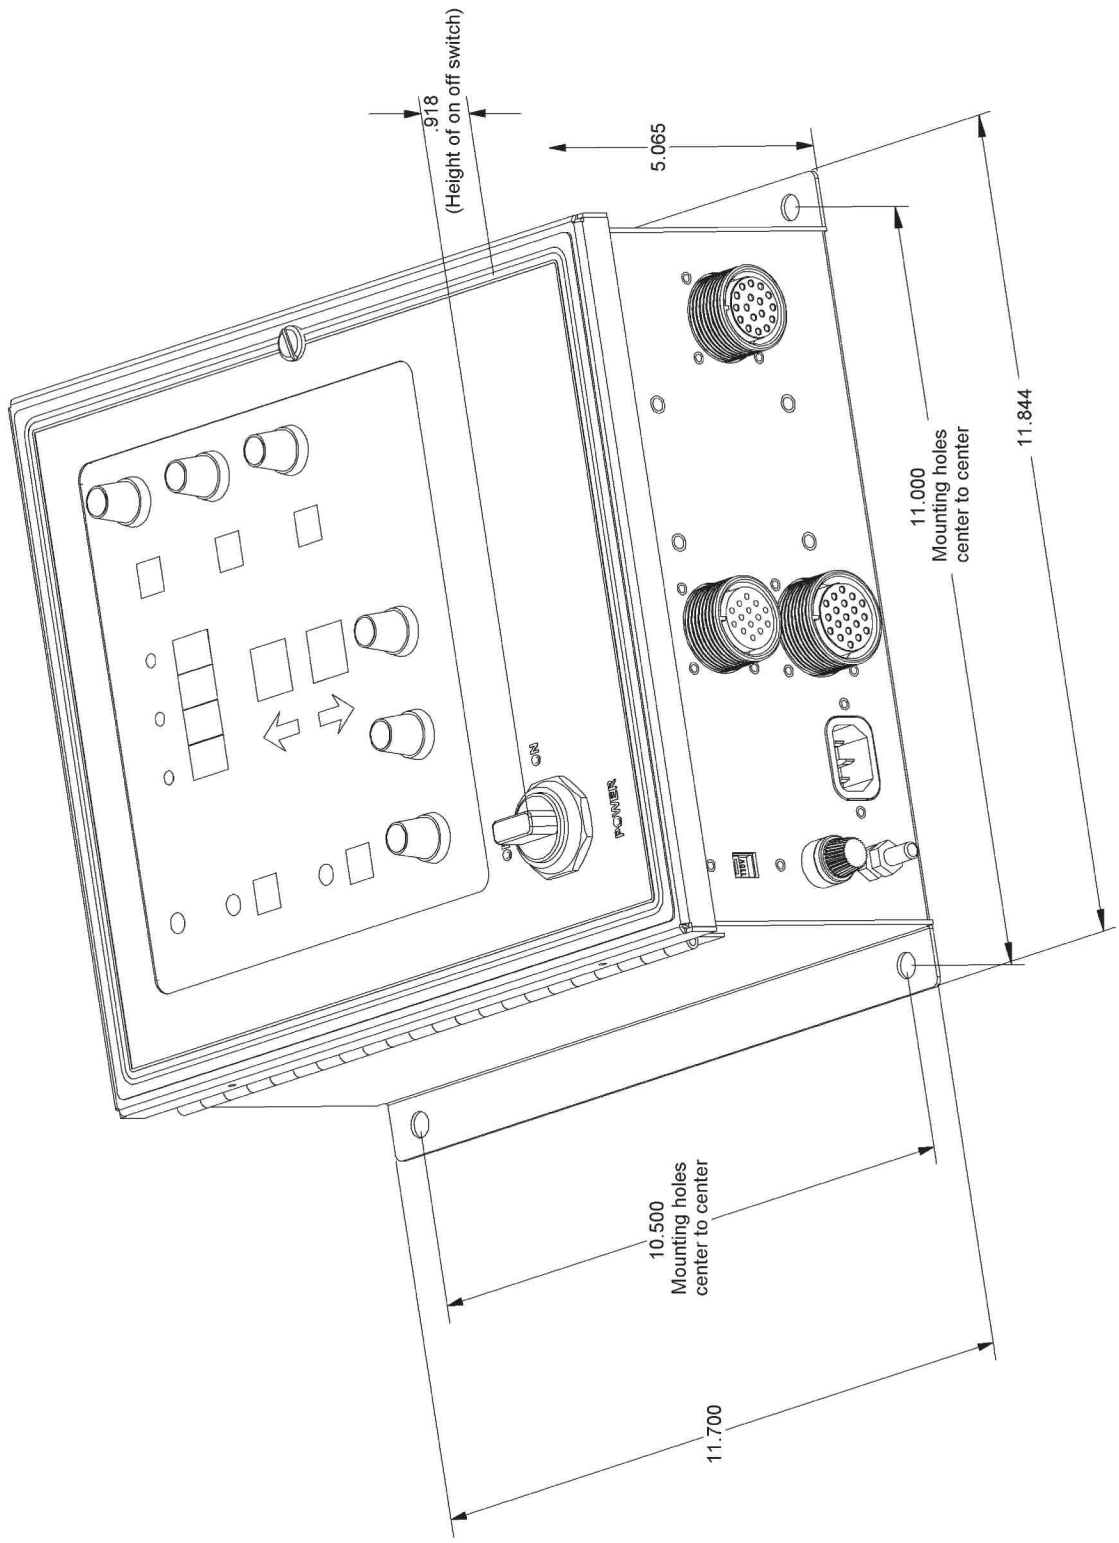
AVC-5 CONTROL UNIT MOUNTING DIMENSIONS
